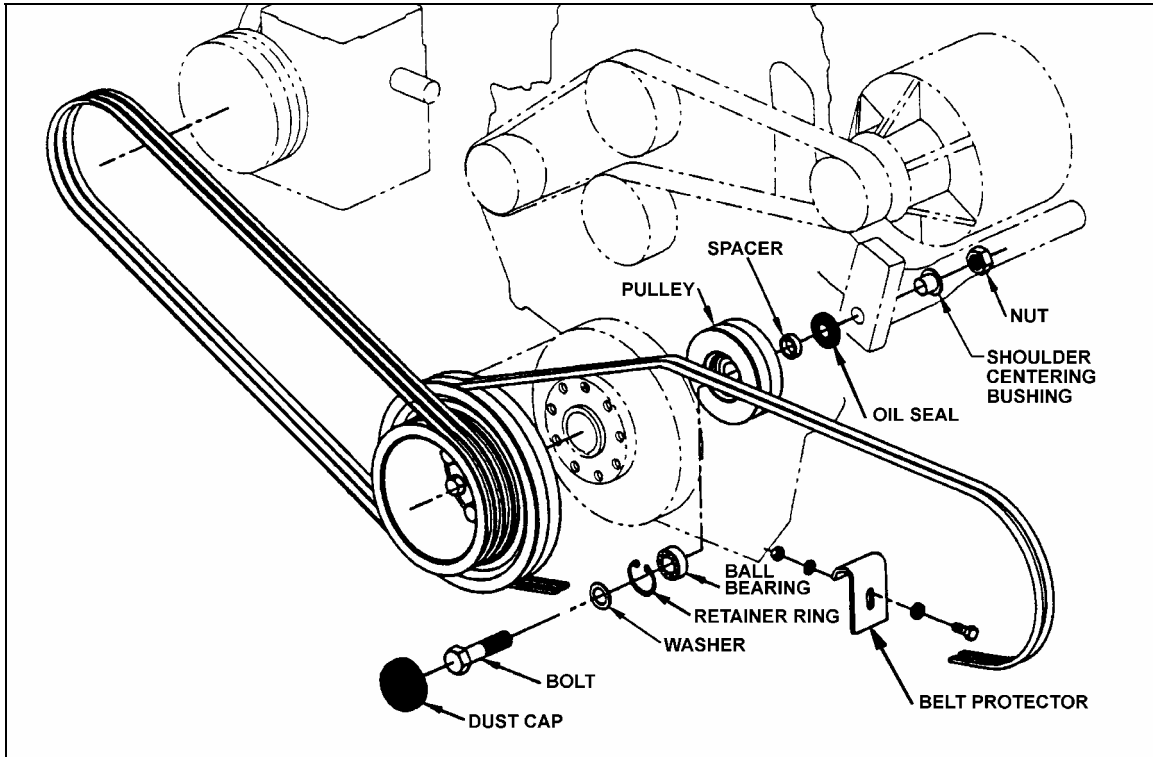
A/C COMPRESSOR DRIVE INSTALLATION
